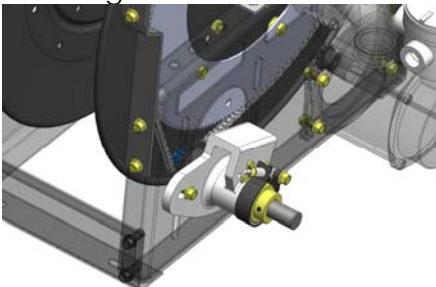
Reel with Spool Chain Attached to Reduction Unit
